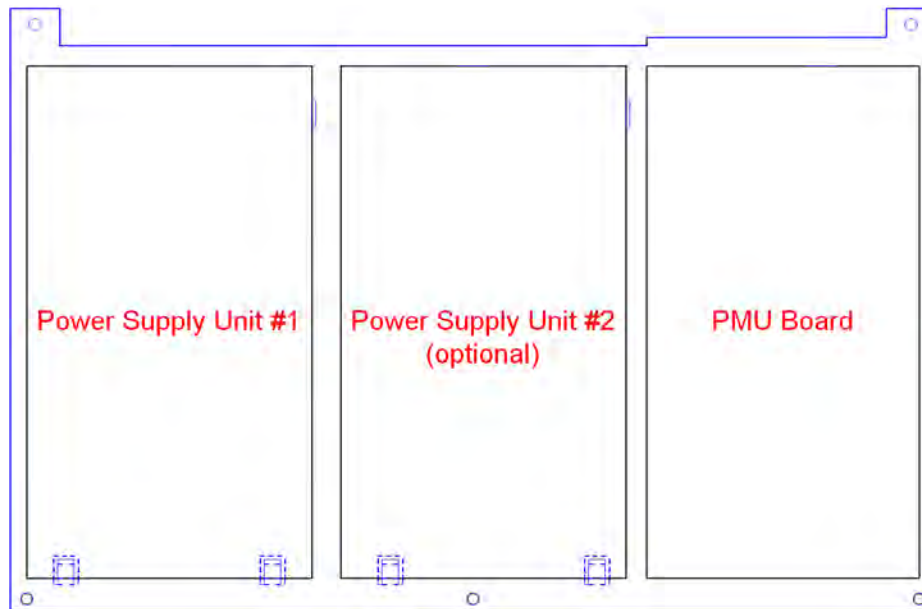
Power Supply/PMU Assembly Layout (shown without wiring harnesses)
